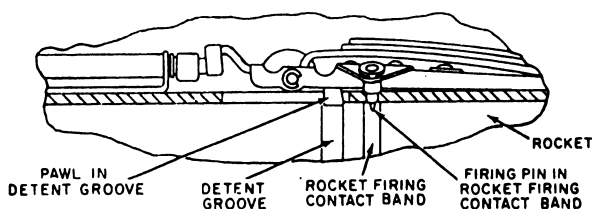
LAU-10 (series) detent pin and firing pin assembly.
